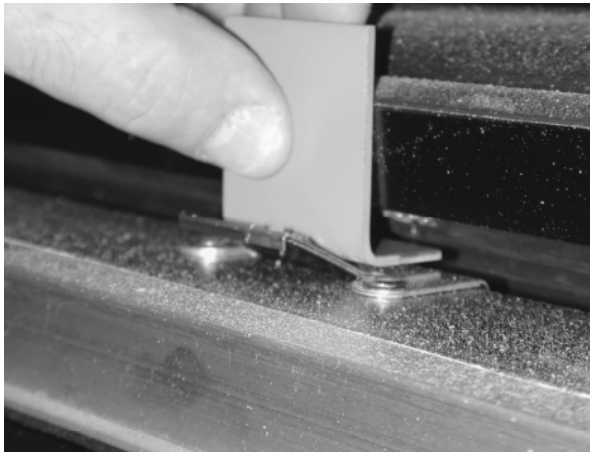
2 mm yellow gauge should fit between the rivet heads and the slider
